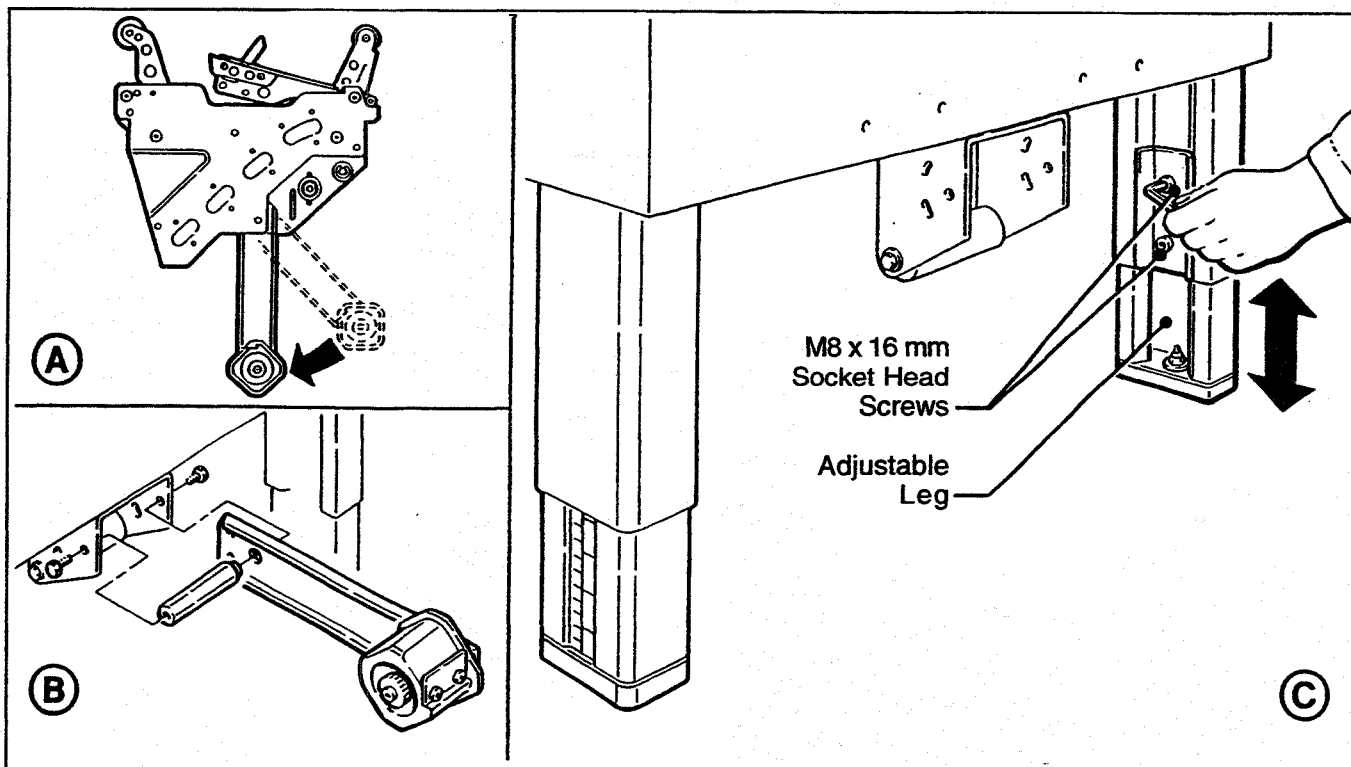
Conveyor Bed Height Adjustment and Lower Tape Drum Bracket Position
